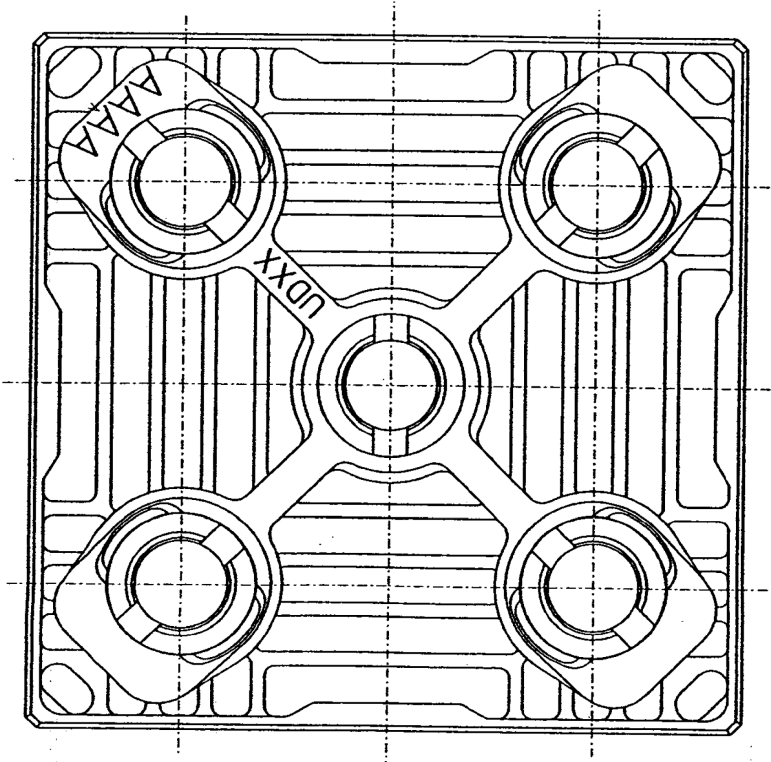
A AREVA - RELOAD FUEL ASSEMBLY BATCH "S" AND PRIOR
